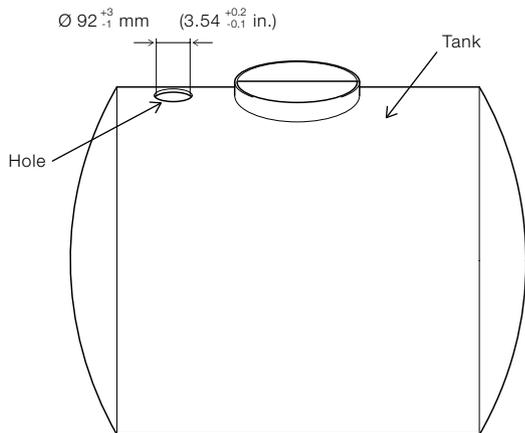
Tank with a hole at the highest point of the tank's surface
